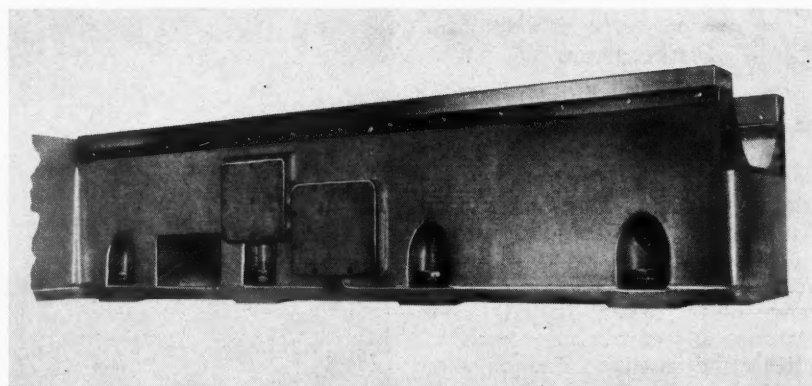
Illustration showing improved method of mounting the new hardened ways on bed of Giddings & Lewis horizontal boring, drilling, and milling machine
